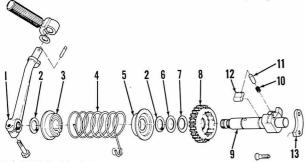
Exploded view of kickstarter. Gear (8) meshes with gear (12-Fig. Y2-18).
